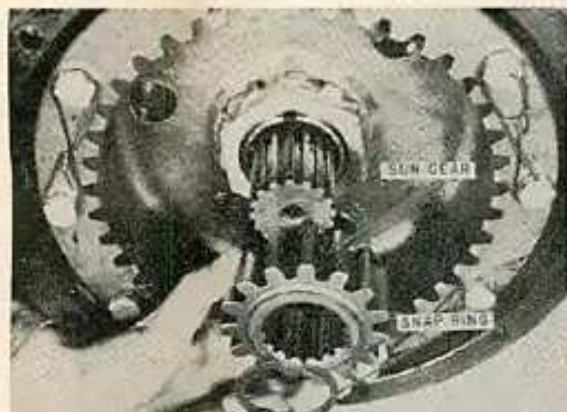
Sun gear can be removed from outer end of axle shaft after snap ring is removed. Note method of safety wiring the internal gear capscrews.
